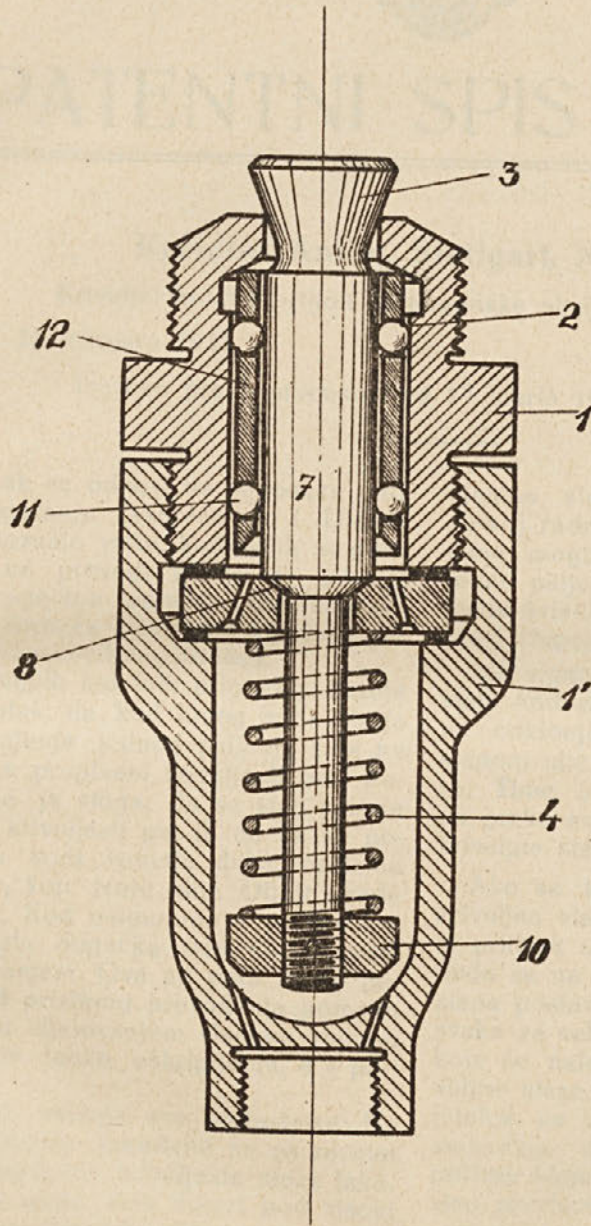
is a longitudinal section of a valve assembly. The valve assembly includes a valve body 1, a valve seat 2, a valve stem 3, a valve disc 4, a valve spring 5, and a valve guide 6. The valve stem 3 is connected to the valve disc 4 and is held in its position by the valve spring 5. The valve disc 4 is seated on the valve seat 2. The valve guide 6 is provided to guide the valve stem 3. The valve body 1 is provided with a valve inlet 7 and a valve outlet 8. The valve assembly is shown in its closed position.
